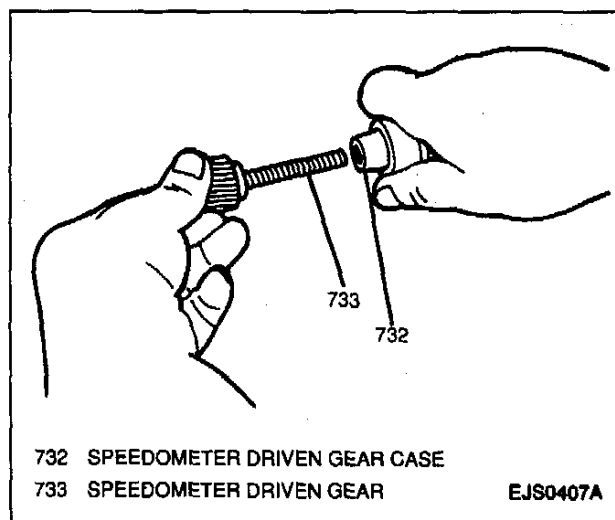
Removing Speedometer Driven Gear from Speedometer Driven Gear Case (3L30, 3-Speed)
